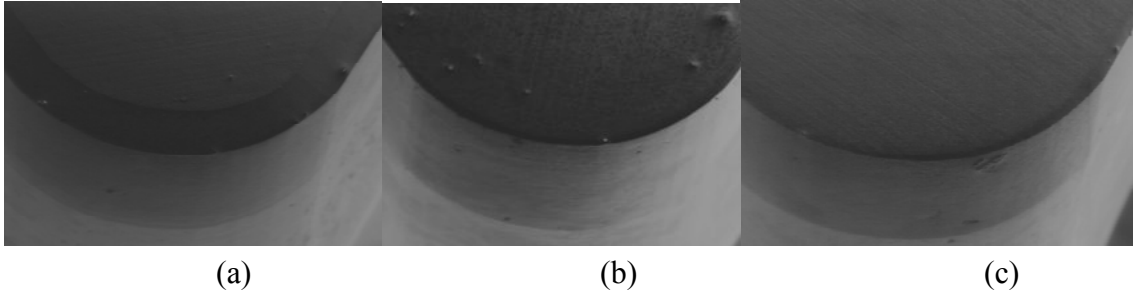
Images of PCBN inserts at 50 times magnification obtained with scanning electron microscopy: a) chamfered, b) uniform honed with 0.05 mm radius, c) variable hone with 0.01 to 0.05 mm radius.
